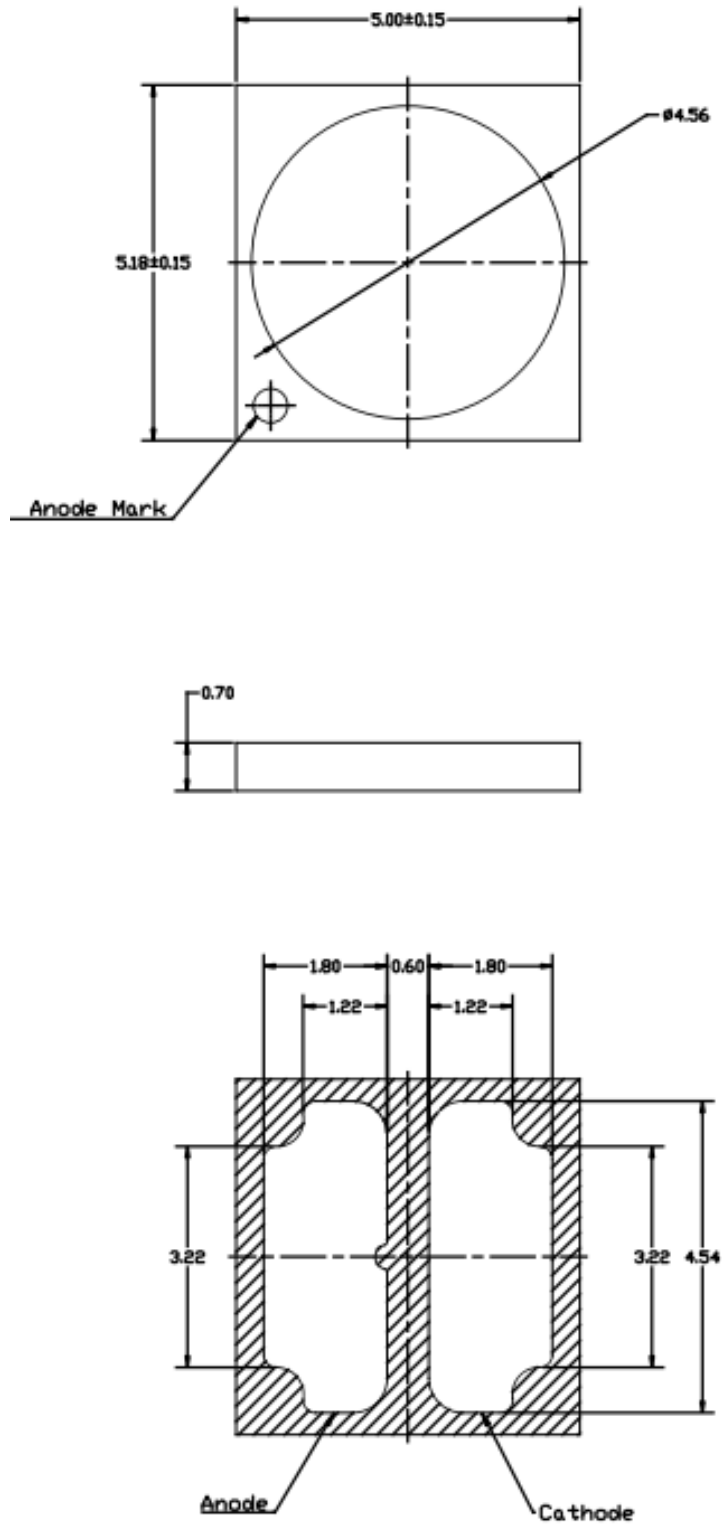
Mechanical drawings for the LUXEON 5050 (all dimensions in millimeters).
